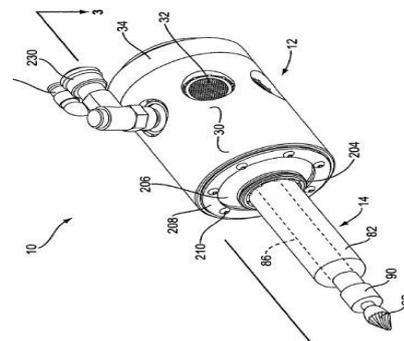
Pneumatic Deburring Tool With Articulated Joint
